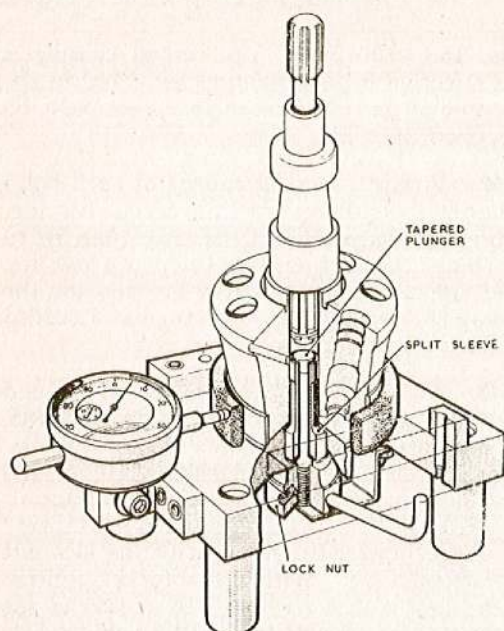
Checking clearance between carbon bearing and rotor journal, using gauge G.50185
